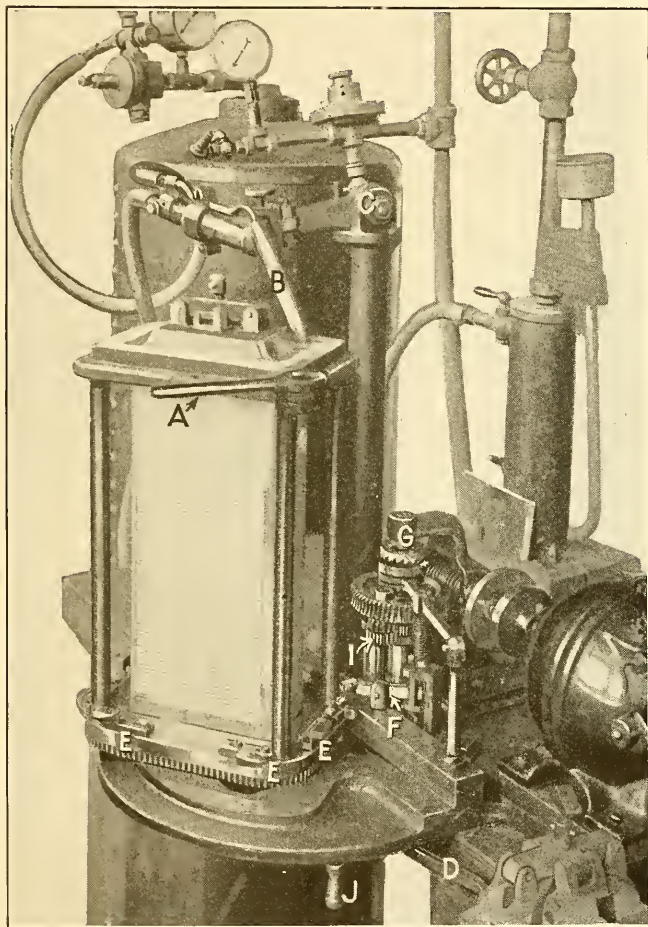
Machine for Welding Oblong Seams.
